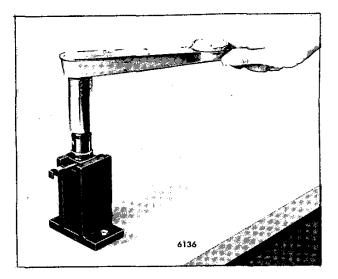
Tightening Injector Nut with Nut Wrench J 29137 and fixture J 29136
